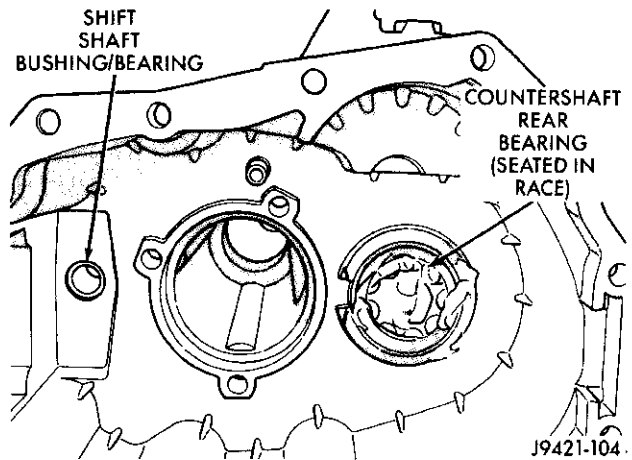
Countershaft Rear Bearing Seated In Seated in Race
